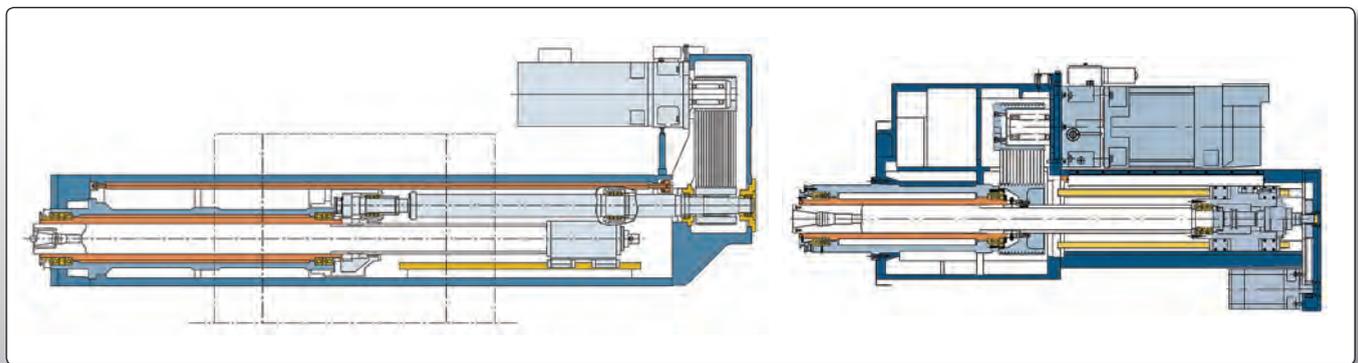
Drive kinematics of the ram and of the headstock [Union]
